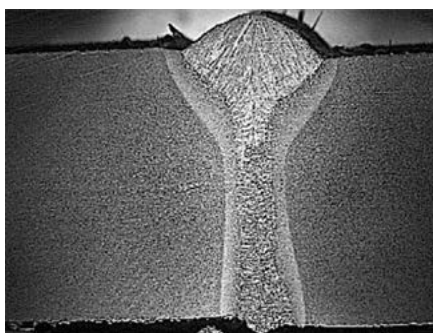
Shape of a weld obtained during hybrid welding [14]
